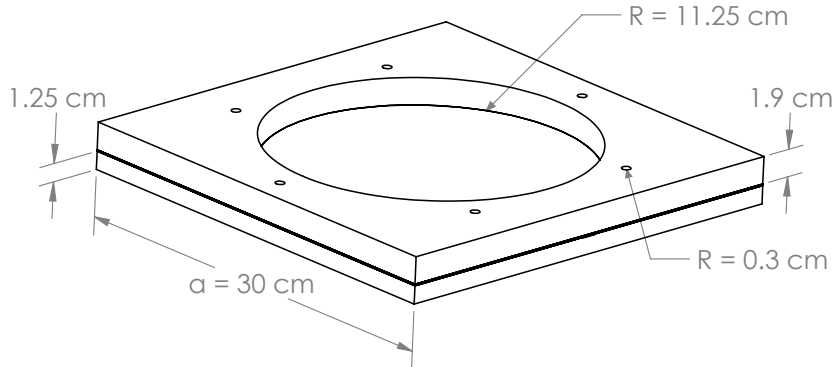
Figure illustrates the manufacturing setup with the copper sheet bolted between two aluminum blocks. The aluminum block on top is machined to include a hole ( $2R = 0.225\text{ m}$ ) in order to directly see the copper sheet underneath and six tapped holes allow for the bolts to fasten. The Aluminum block on top also acts like the boundary (walls) for the liquid poured over the copper sheet.
